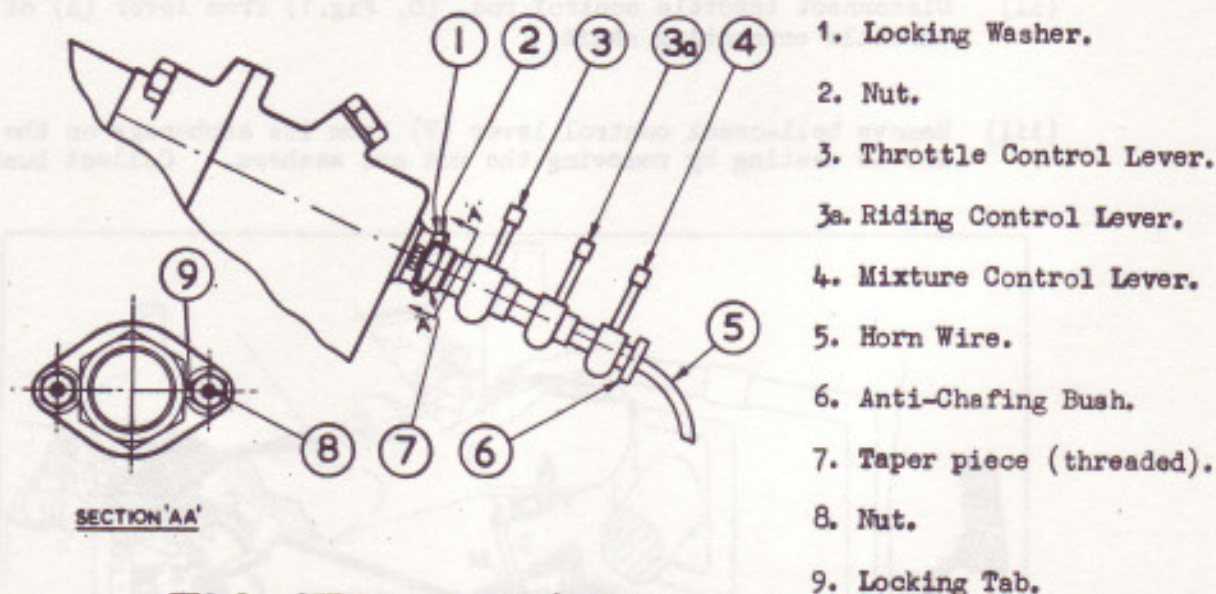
STEERING COLUMN (BOX) - Lower End.
